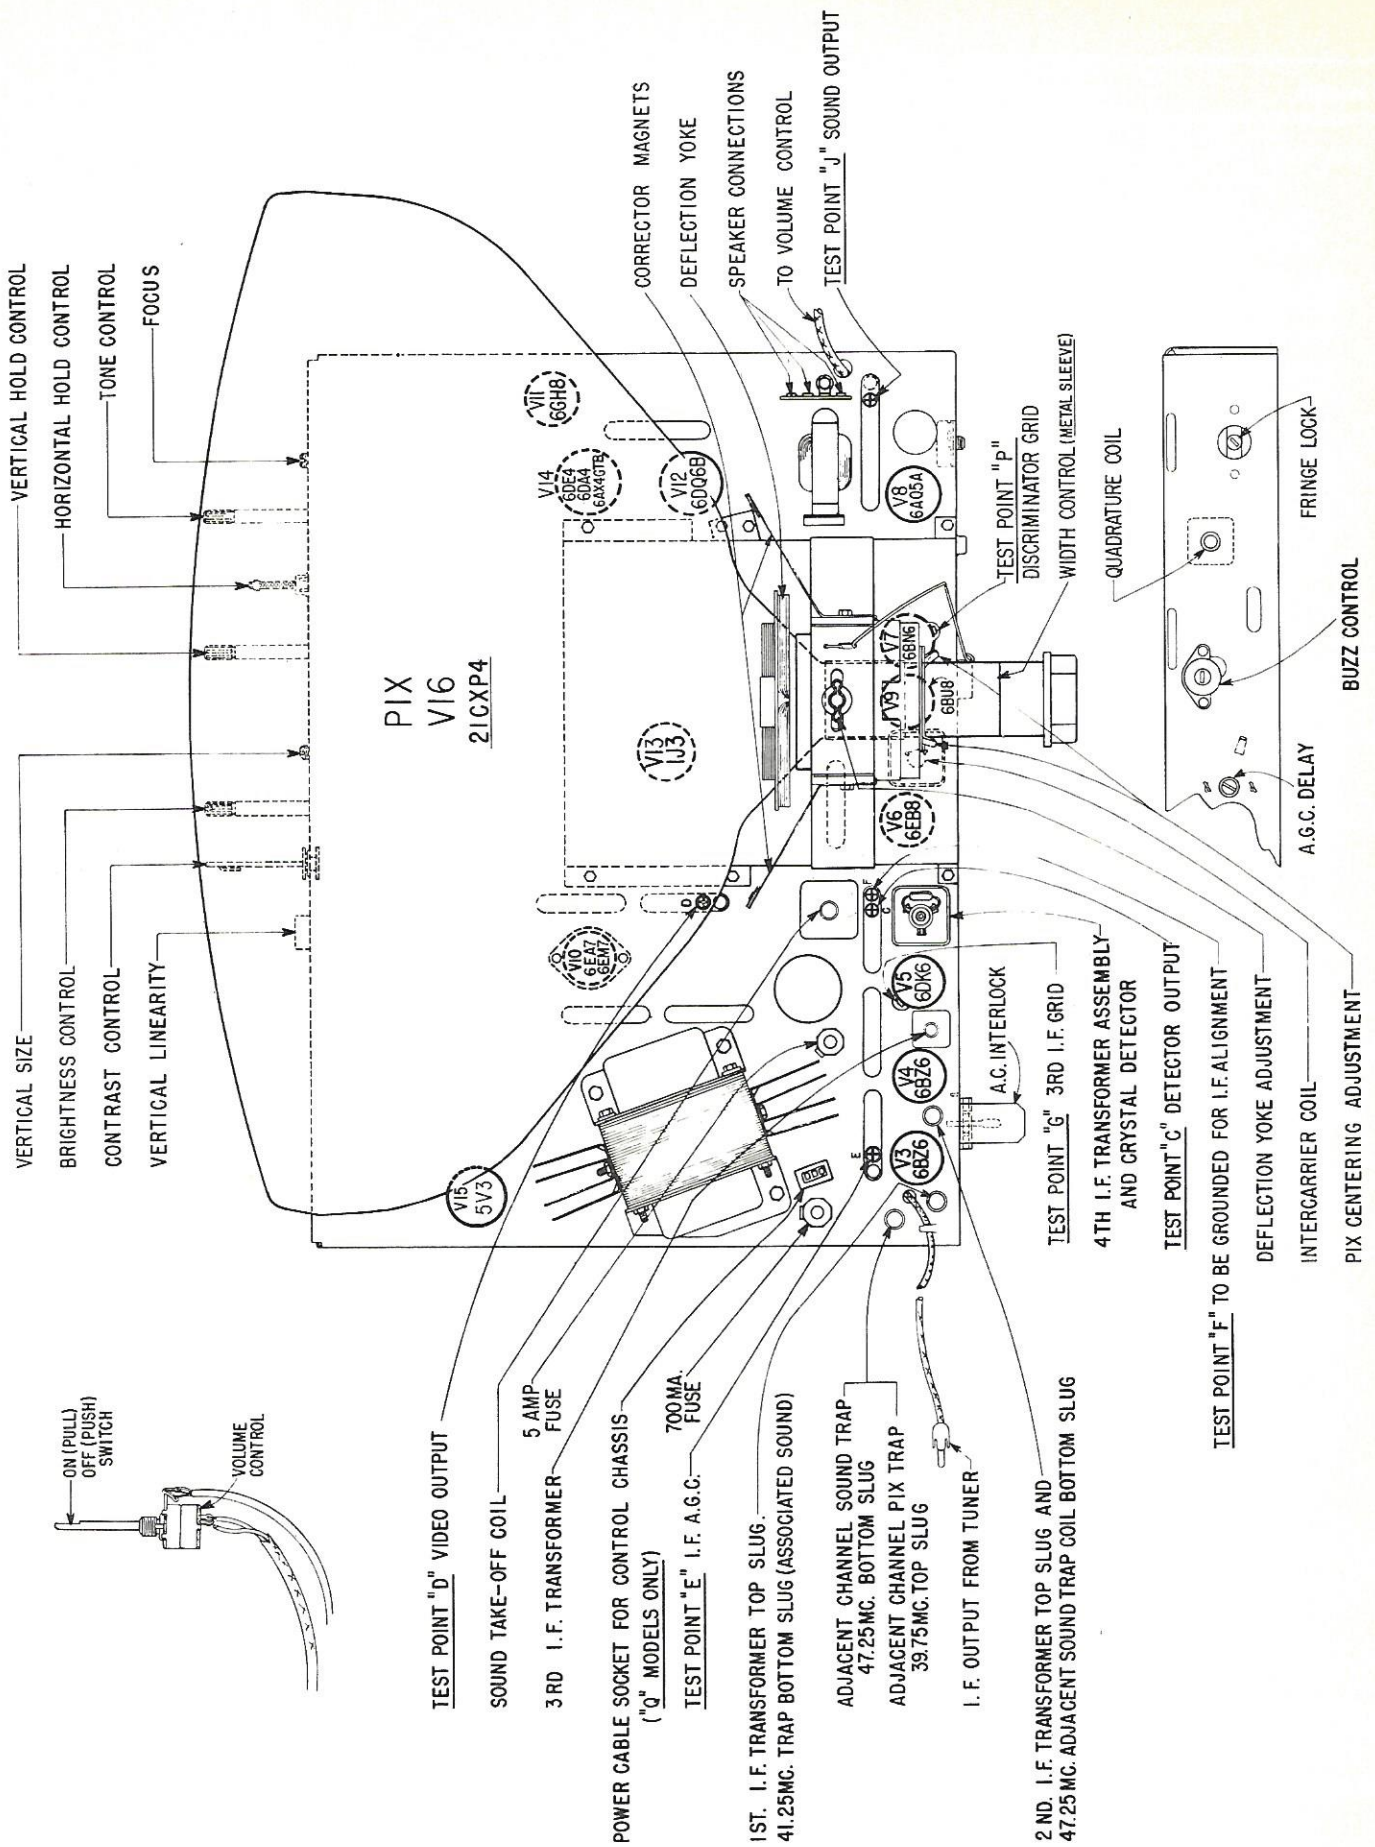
Tube and Trimmer Layout 16E21, 16E21Q, 16D21 and 16D21Q Chassis
